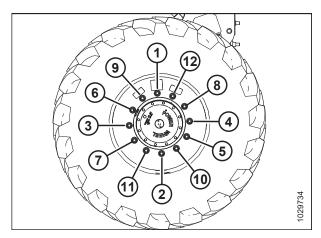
Tightening Sequence – Twelve Bolt Wheel
